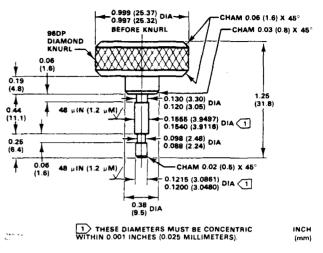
Relay Alignment Tool (Part Number 15A3519 X012)
